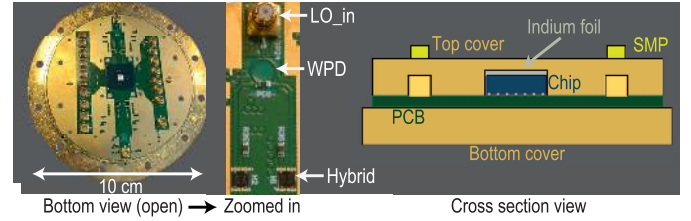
From left-to-right: the bottom view of the opened gold-plated copper enclosure, a zoom-in on the PCB showing the WPD and discrete hybrids for the LO input, and a drawing of the cross section of the full enclosure.
